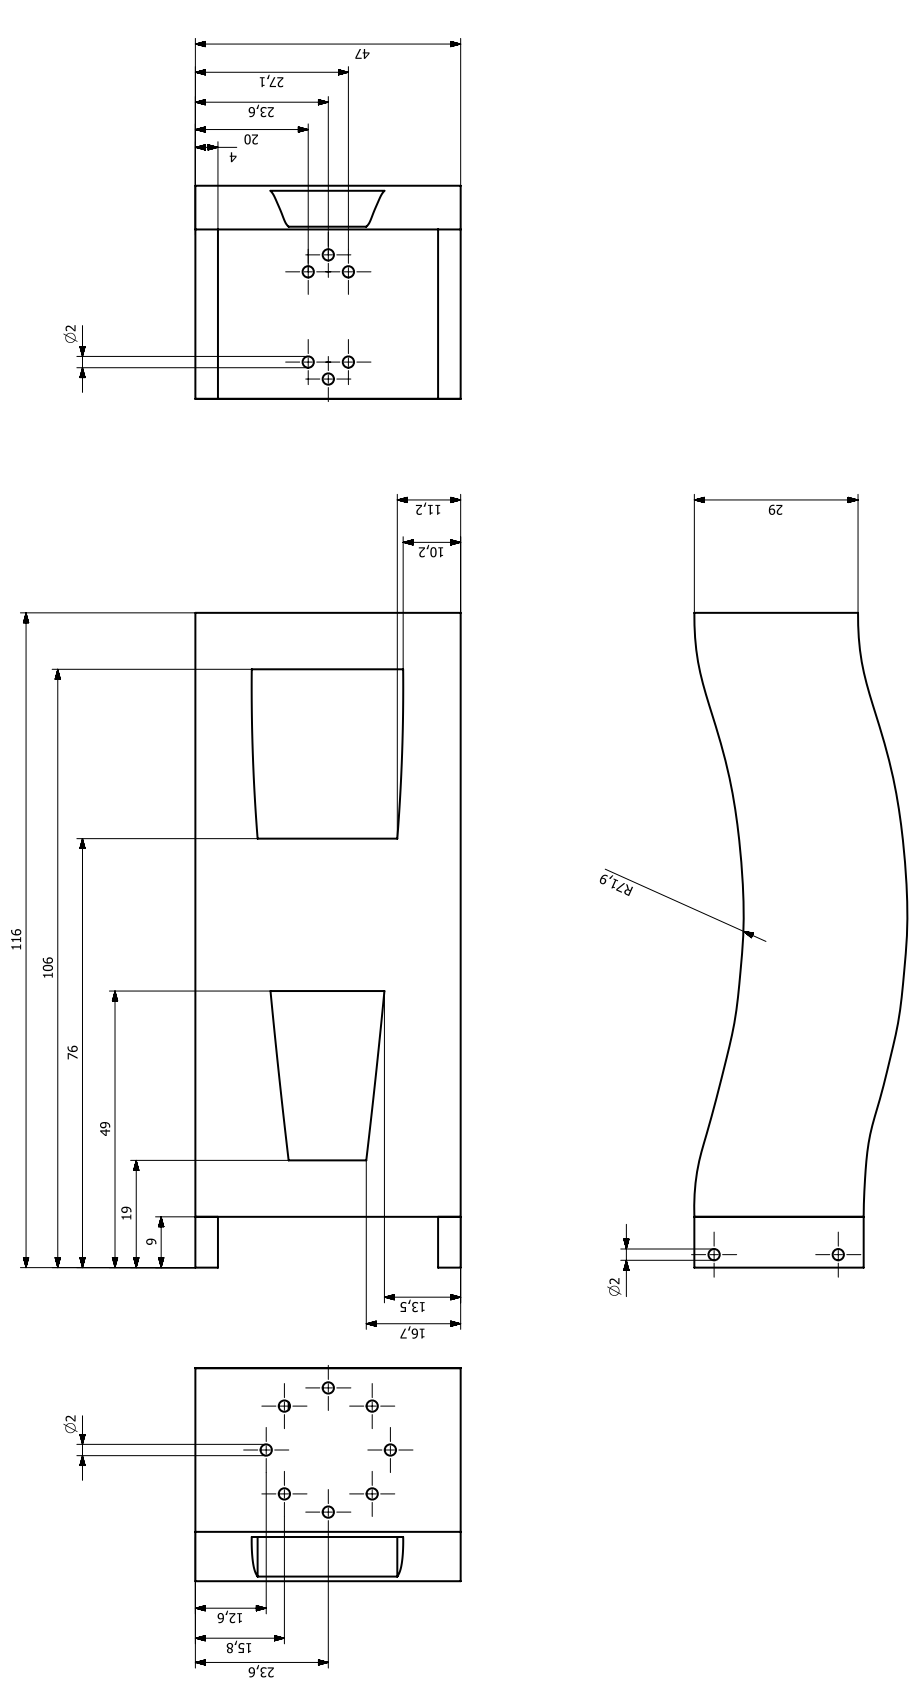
Technical drawing of the one legged platform illustrated from three perspectives.
